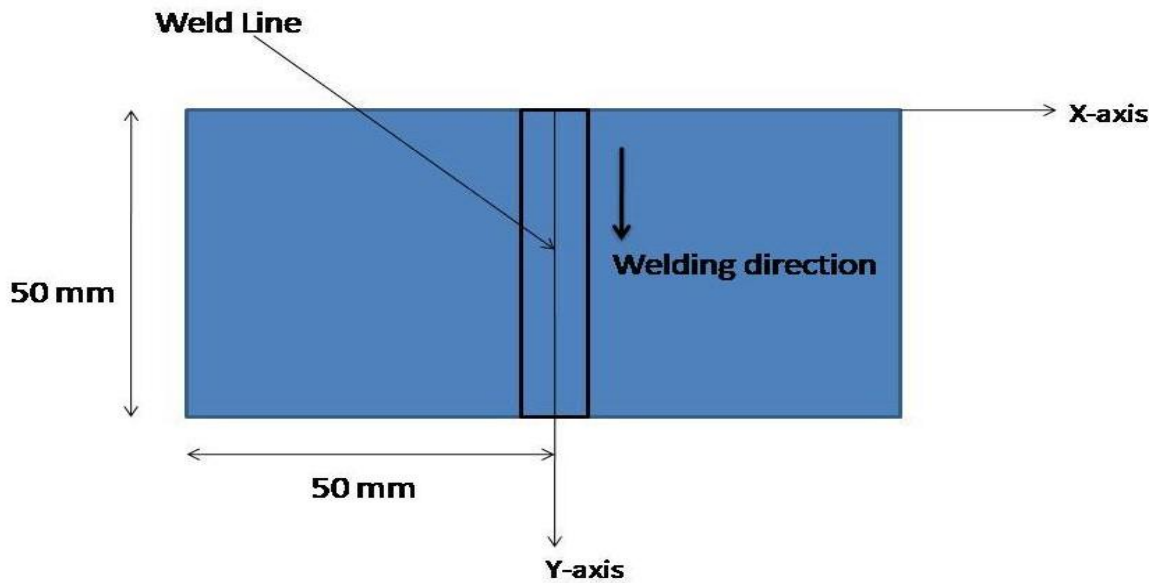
Welding plates of size 50mm x 50mm x 5 mm with butt joint
